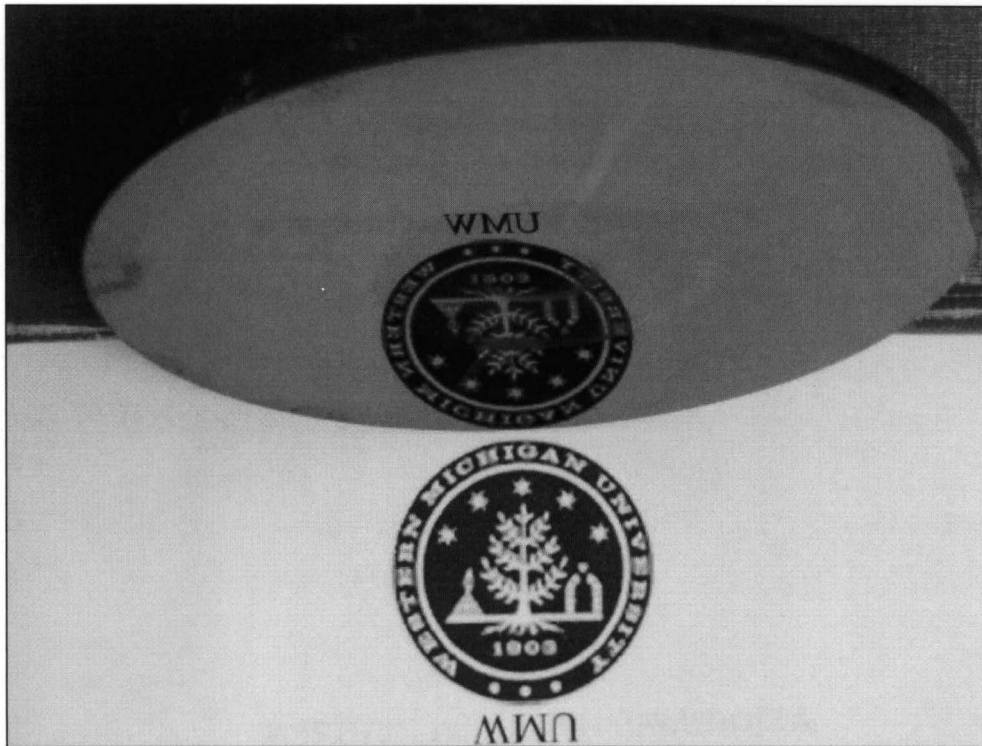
Picture showing the optical quality of the surface finish on the machined CVD SiC sample
